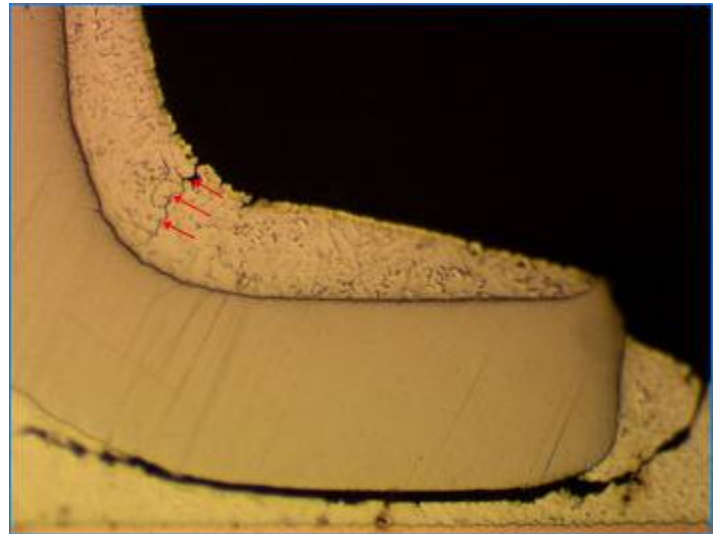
cross section, SN66, U62, right lead solder crack, 200xa
